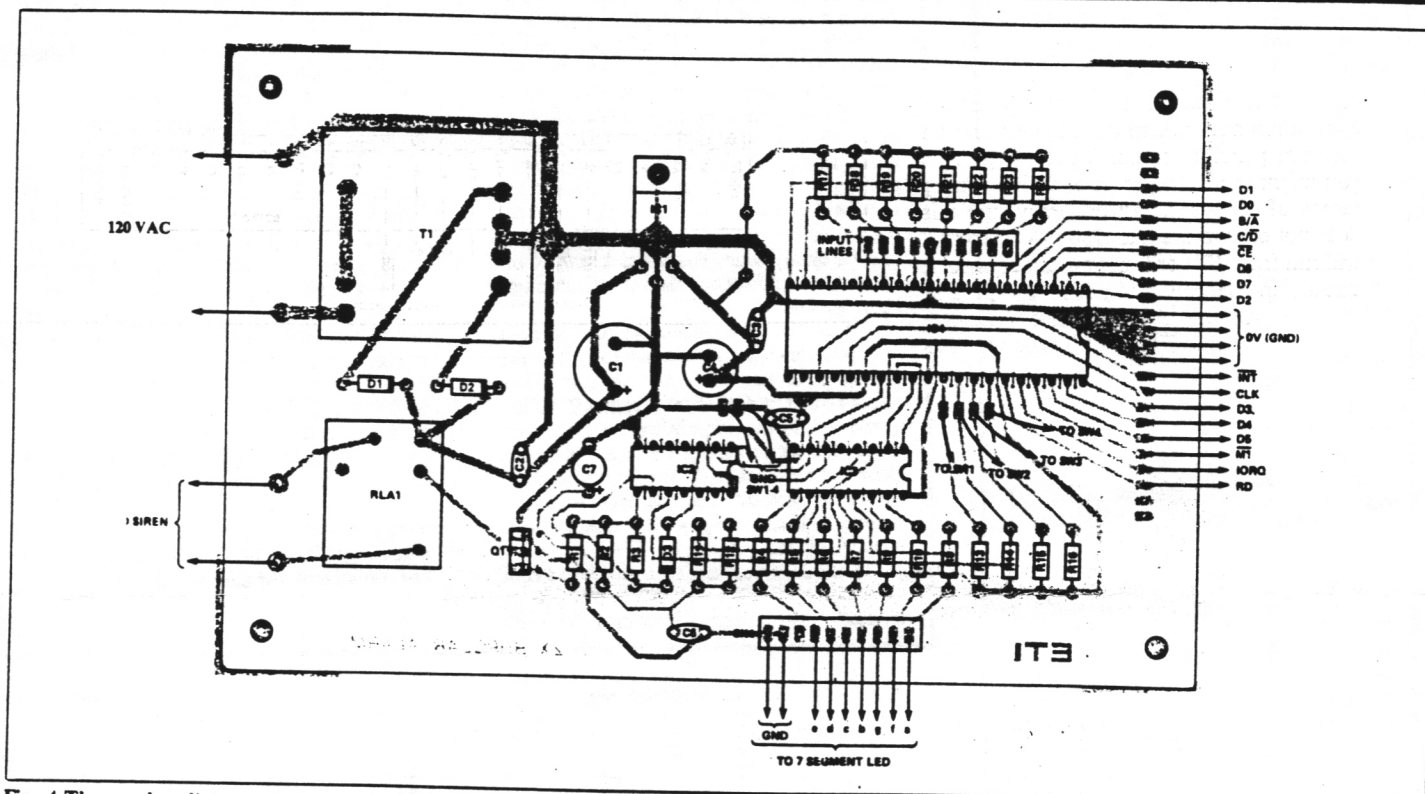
The overlay diagram for the PCB. Note: the circuit was originally designed for a PC-mounting transformer which may not be available. An ordinary transformer can be mounted off the board with the leads soldered to the PC pads.
